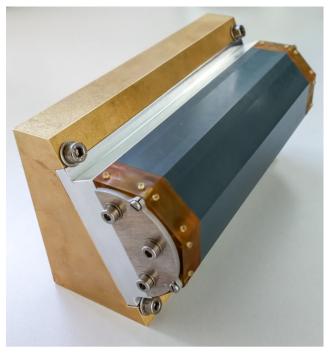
Assembly tool for layer 2 modules. Tilting of the full tool and sliding of the grey block allows to bring every facet into the horizontal position.
